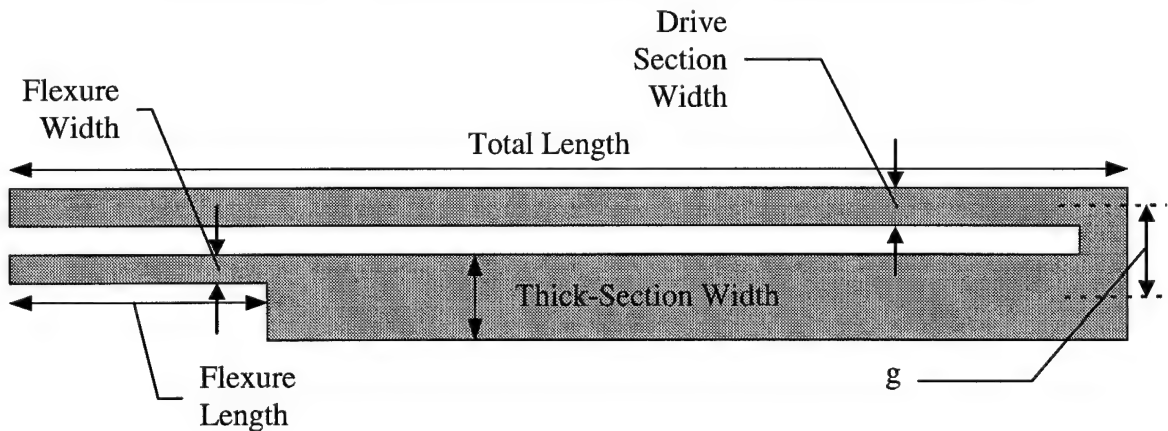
Heat-Drive Actuator. This figure shows some of the dimensions and labels some of parts of the heat-actuator. The dimension labeled g is measured from $1/2$ the midsection of the drive section to the midsection of the thick section.
